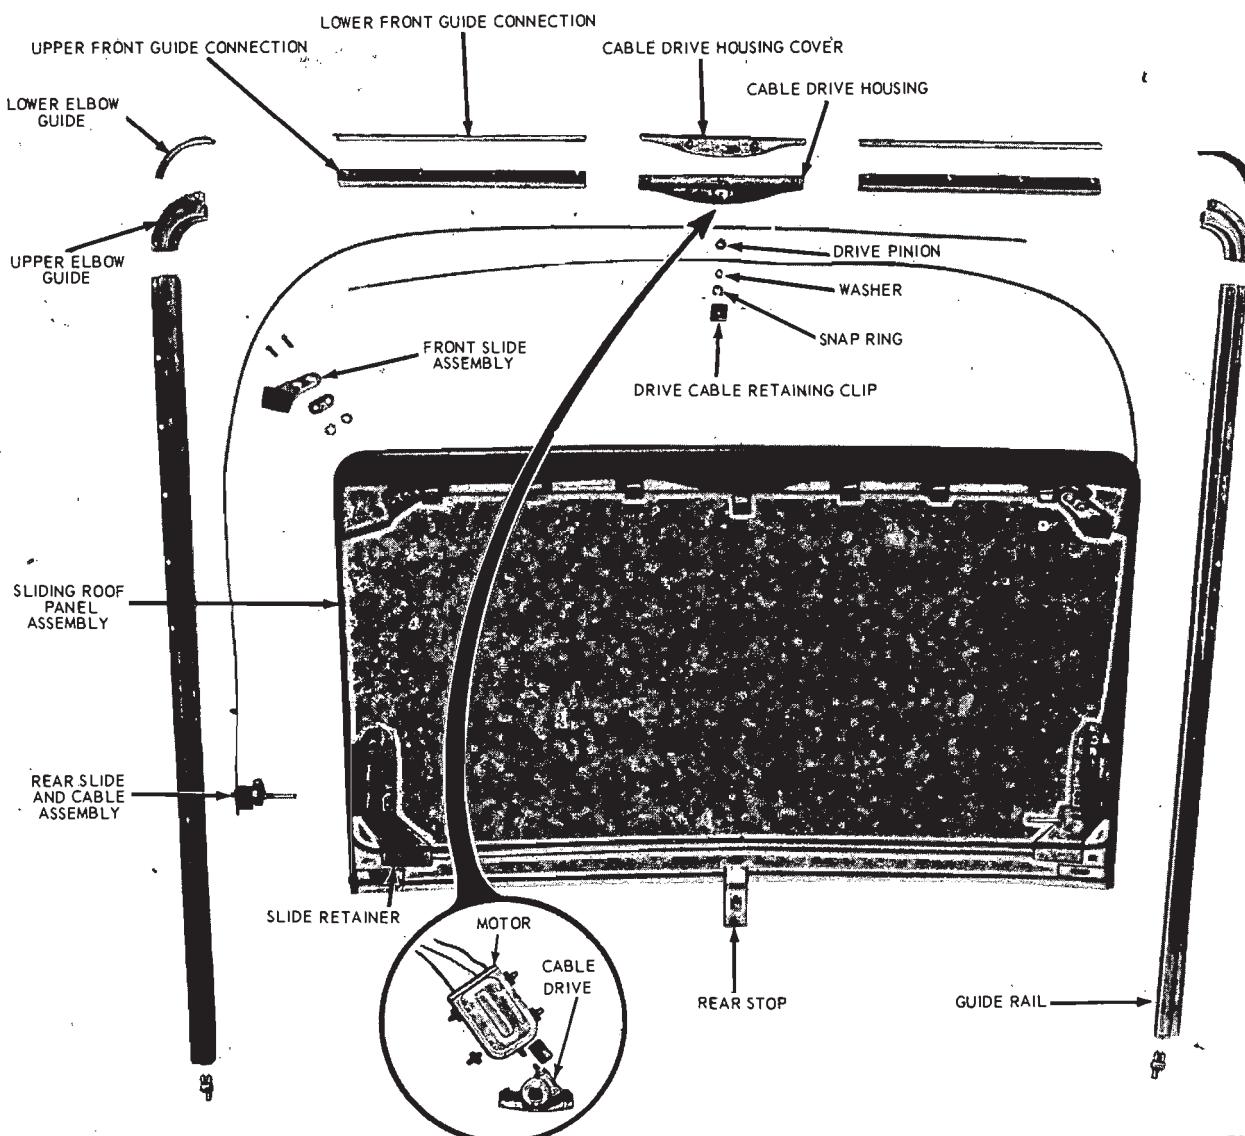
Sun Roof Sliding Panel—Disassembled View
